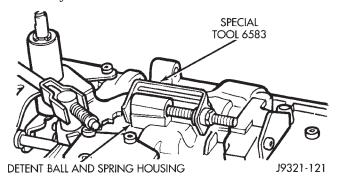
Securing Detent Ball And Spring With Retainer Tool
